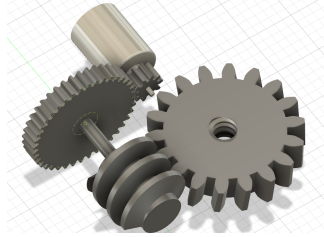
3-D Render of the Final Gear Box and its Connection to the Motor
